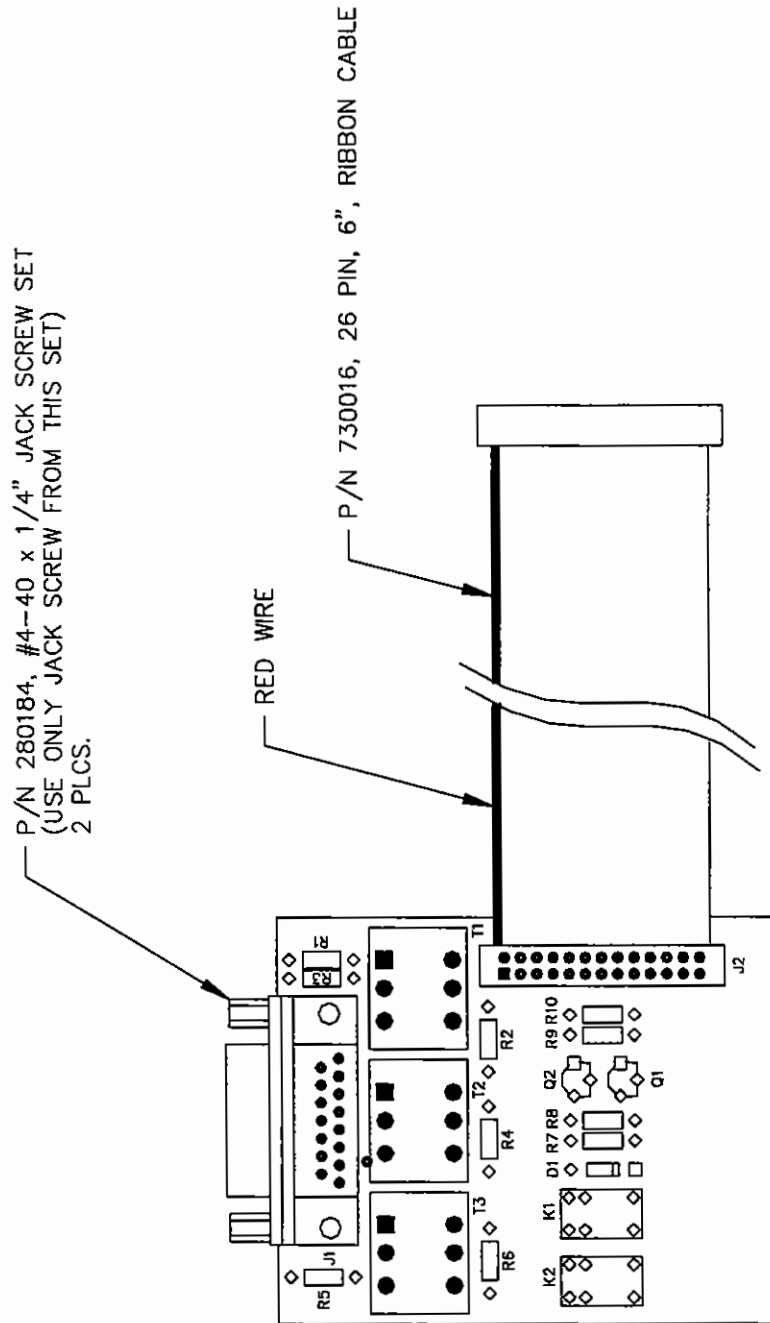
Assembly Drawing - OPT-100 Module Rev. A
